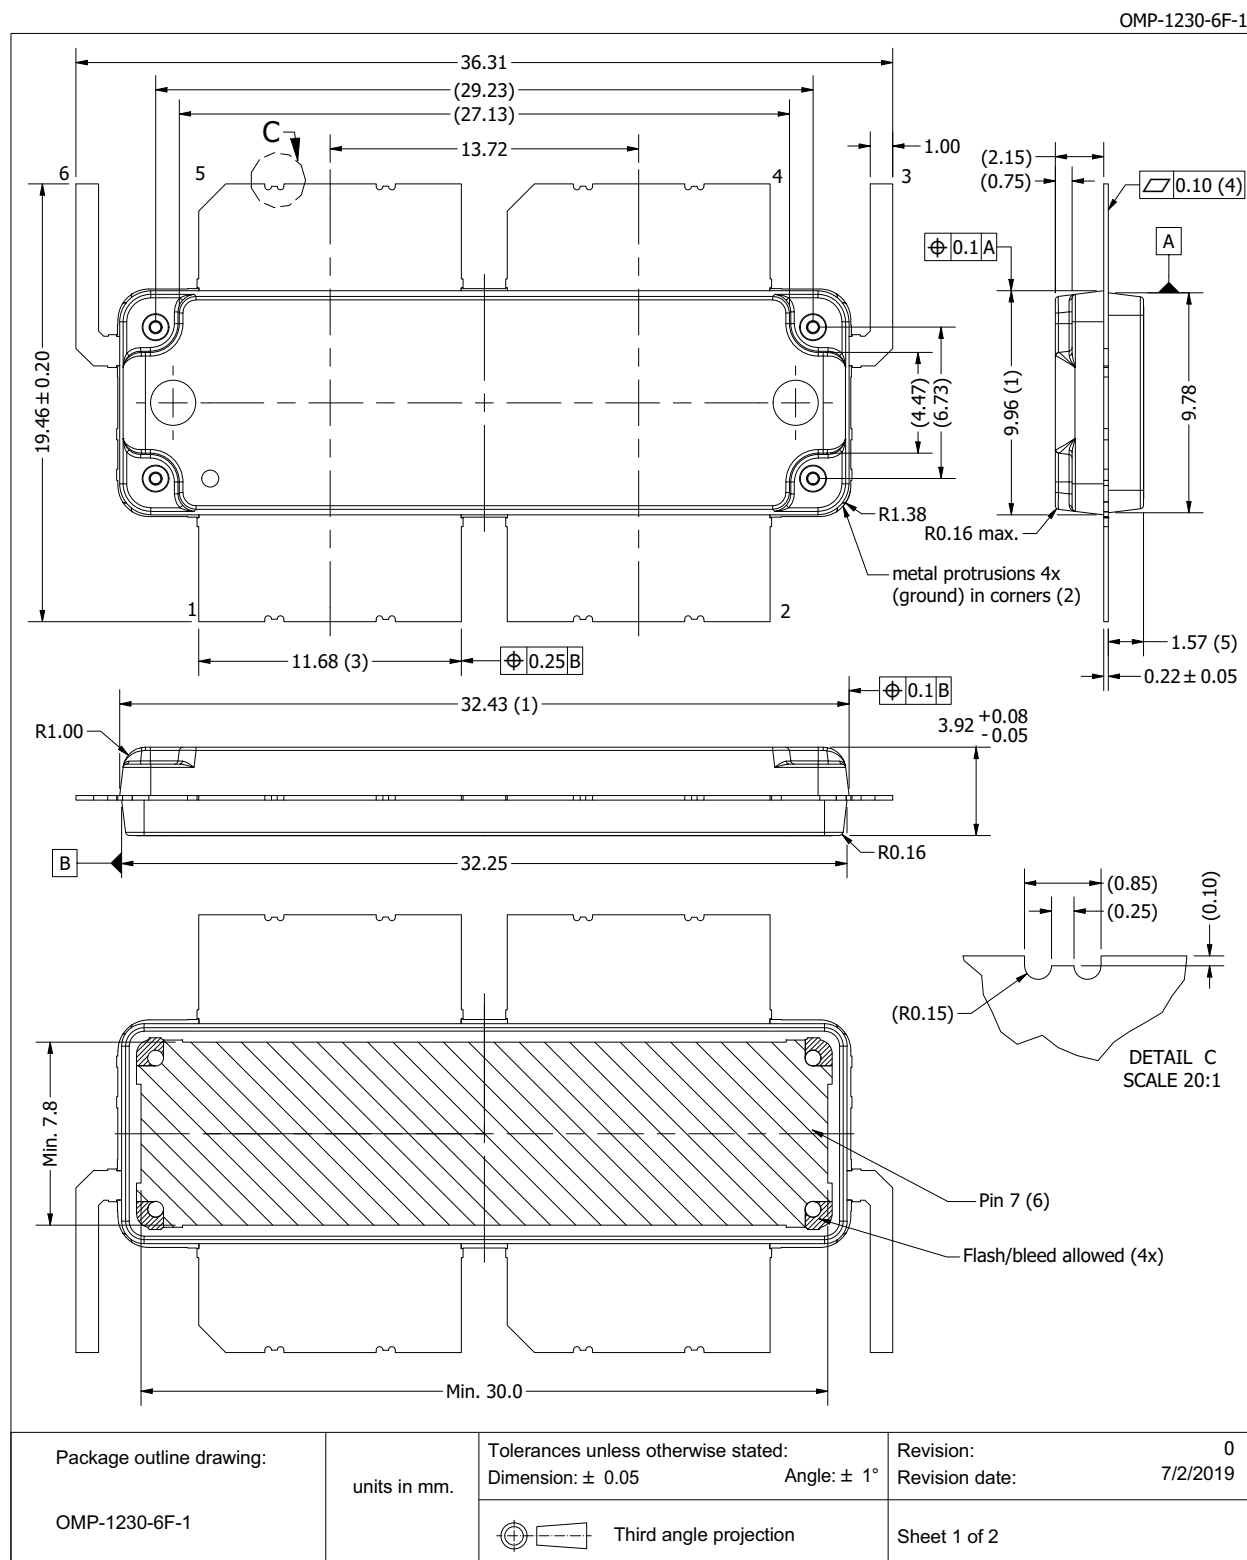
Package outline OMP-1230-6F-1 (sheet 1 of 2)
